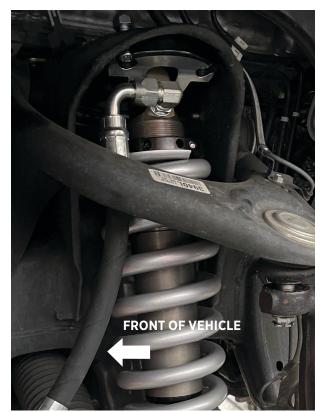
Machined flat on top hat. Fig. 7a: Install FOX shock assembly.
